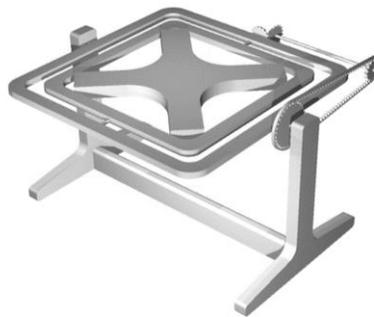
A biaxial rotational machine with an X-shaped mold at the center.
